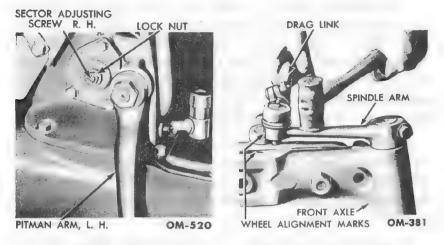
Steering Sector Clearing Adjustment Fig. 34—Drag Link Removal
